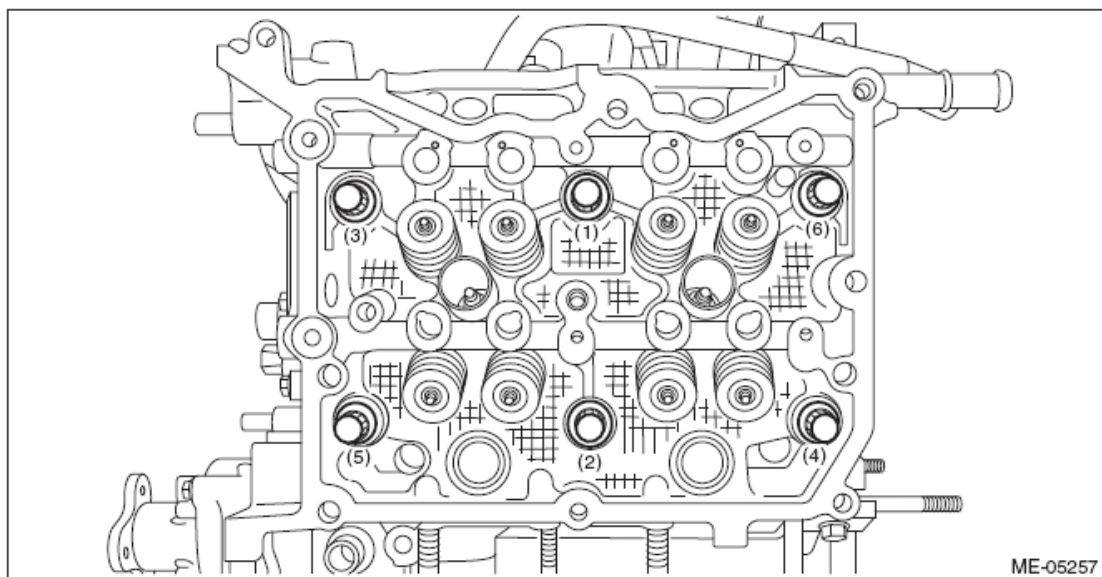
Identifying Cylinder Head Bolts Tightening Sequence
